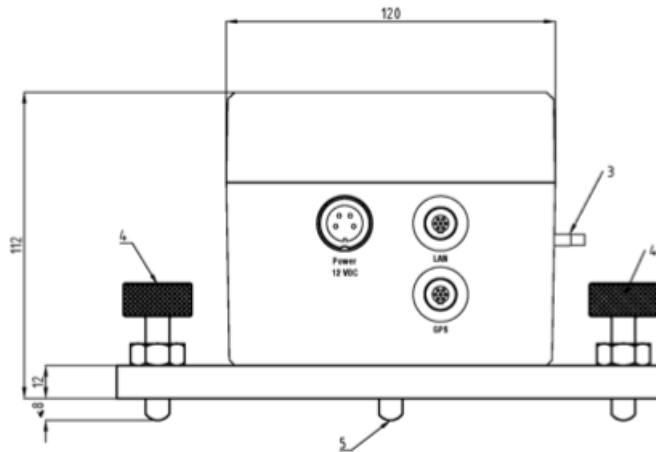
Mechanical drawing of the MR3000 - Side View
